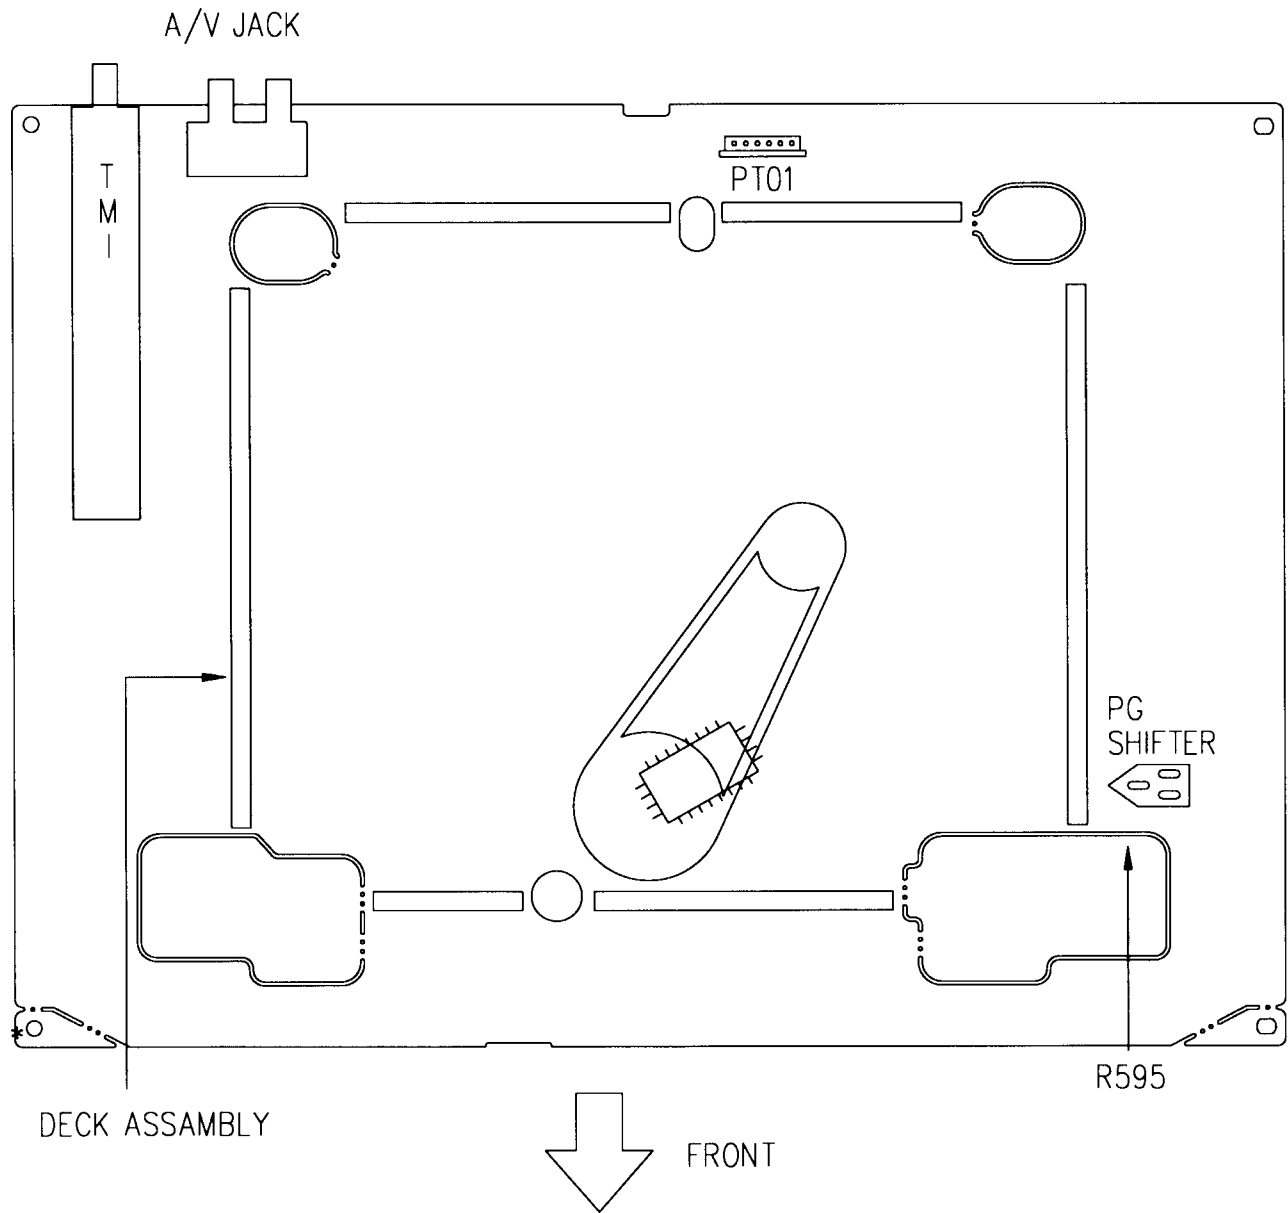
Main Board Test Point/Control Location Guide (Component)
